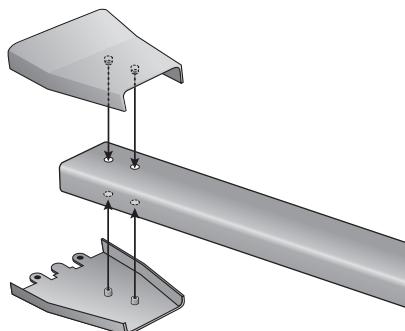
Bracket posts fitting into LNB arm (bolt holes removed for clarity)
